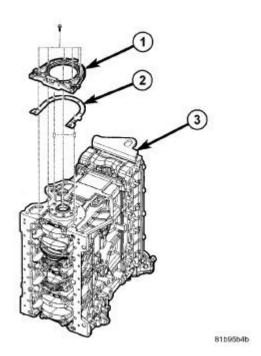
REAR MAIN SEAL GASKET Courtesy of CHRYSLER LLC
